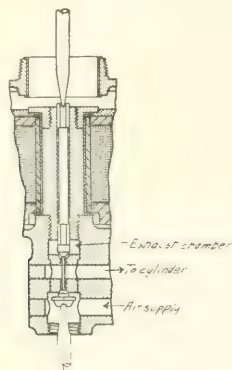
VALVE STEMS IN PLACE FOR GRINDING
